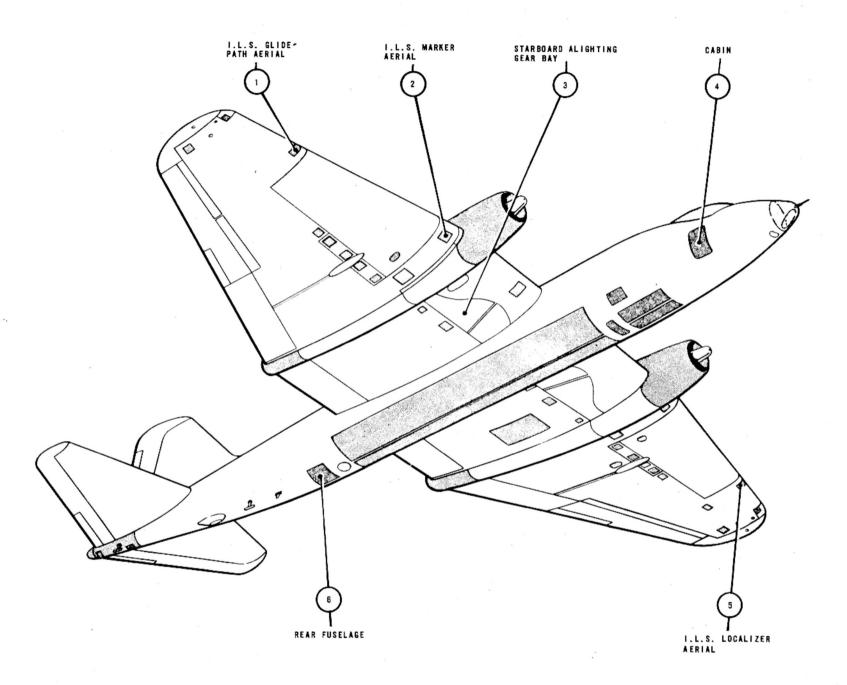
WIRELESS INSTALLATION - ACCESS PANELS, LOWER SURFACE AND STARBOARD SIDE
